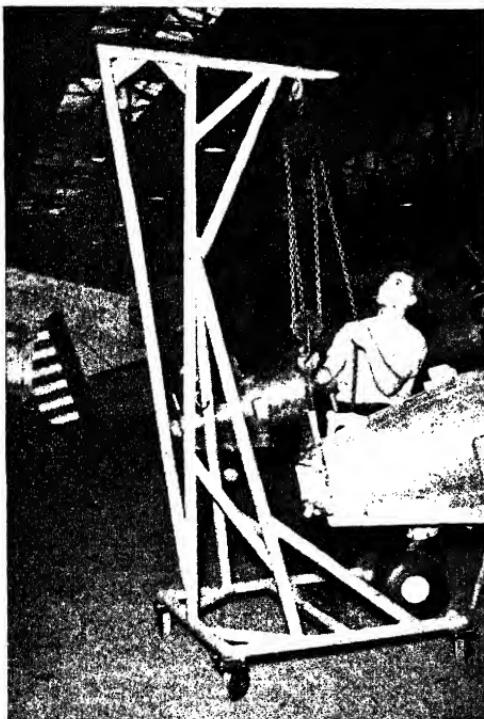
Light hoist for lifting the tails of trainers and pursuit planes. (*Official Photograph, U.S. Army Air Corps.*)
